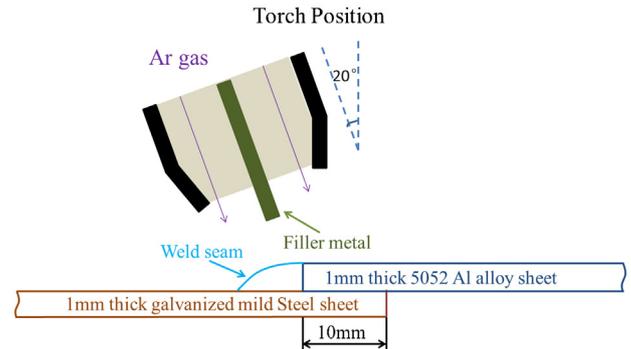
Schematic diagram of the gas metal arc welding process.
